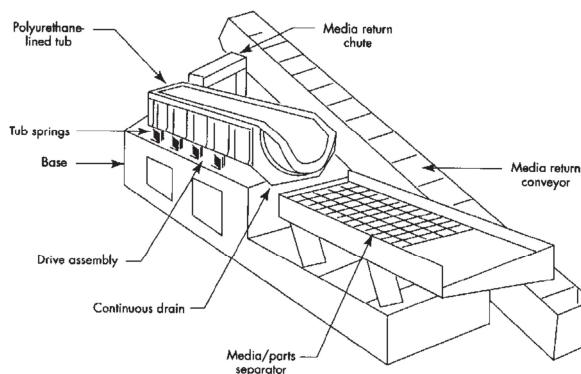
Tub-type vibrator with automatic workpiece loading conveyor and another conveyor system to return media to the tub (courtesy: SME)
